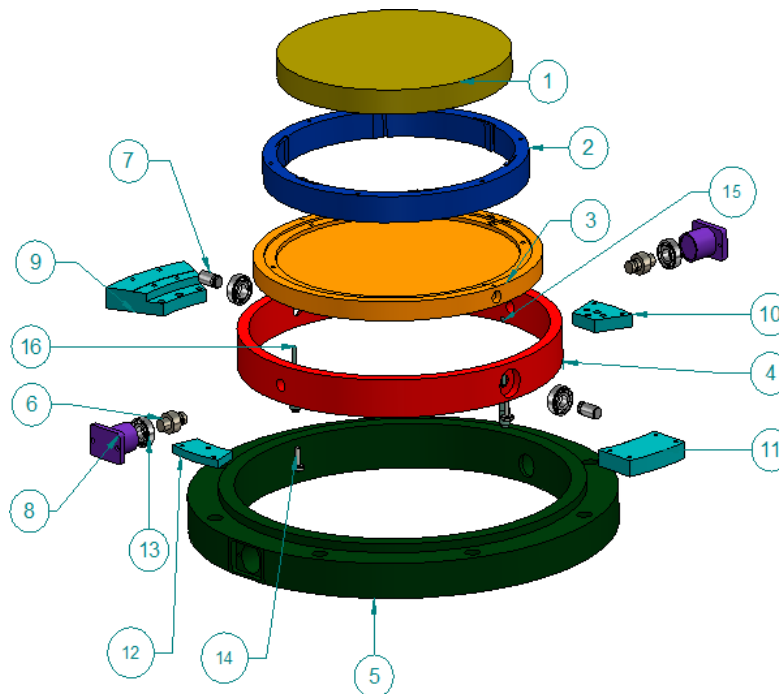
Exploded view of the mirror mount assembly showing all sixteen components (item numbers per Table 1).
